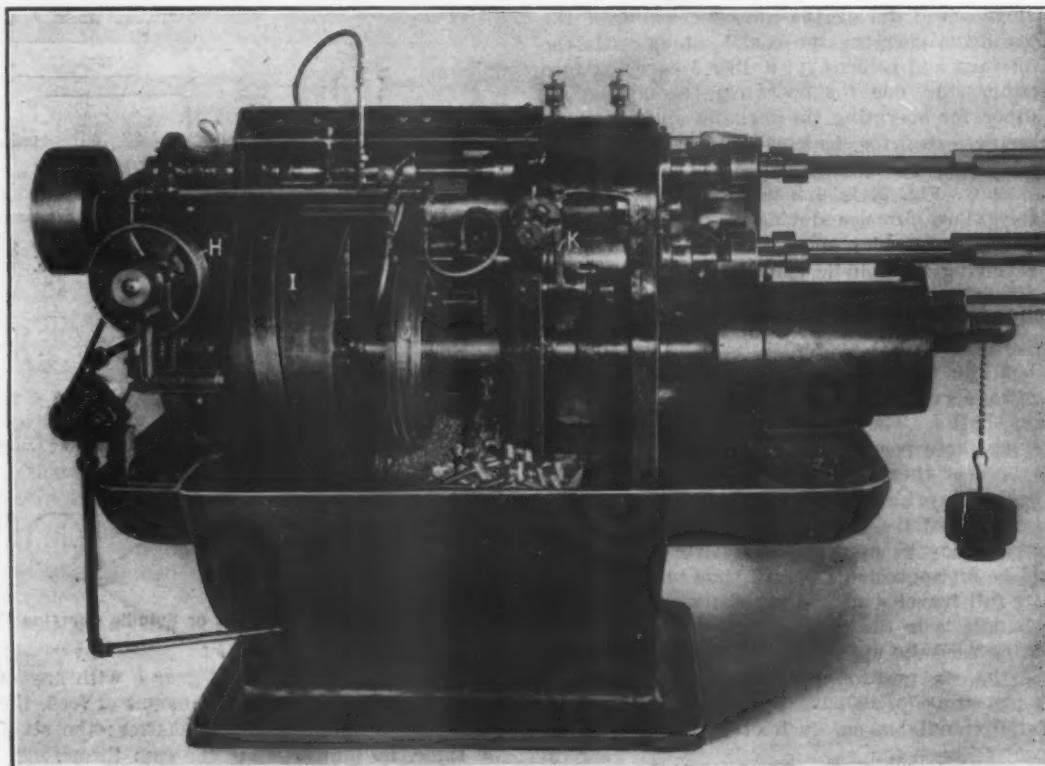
Rear View of the Gridley Automatic Multiple Spindle Turret Lathe.
